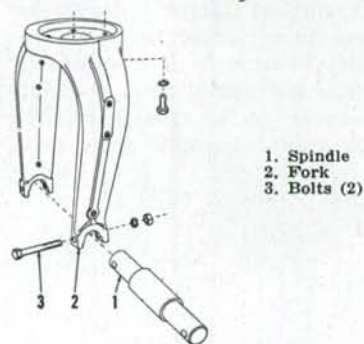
Exploded view of single front wheel fork and associated parts.
